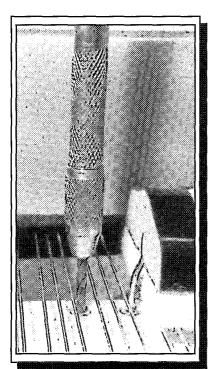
Using a 3/32" drill in a pin vise to ream a very tight guide rail bushing. Smooth the bushing with an awl afterwards.
